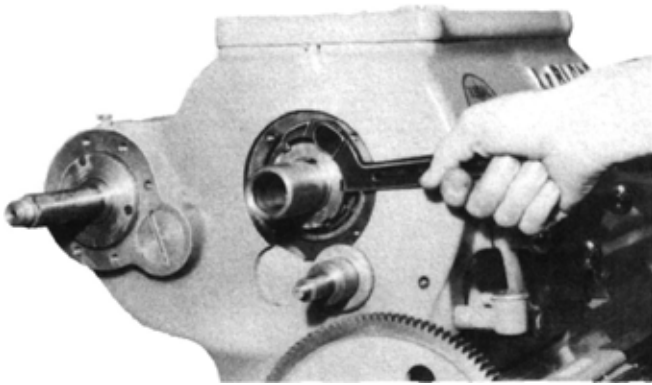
ADJUSTING HEADSTOCK SPINDLE
